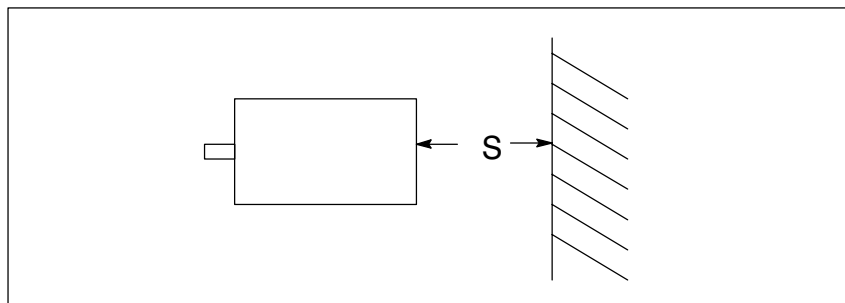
Minimum clearance to air intake and air discharge openings
